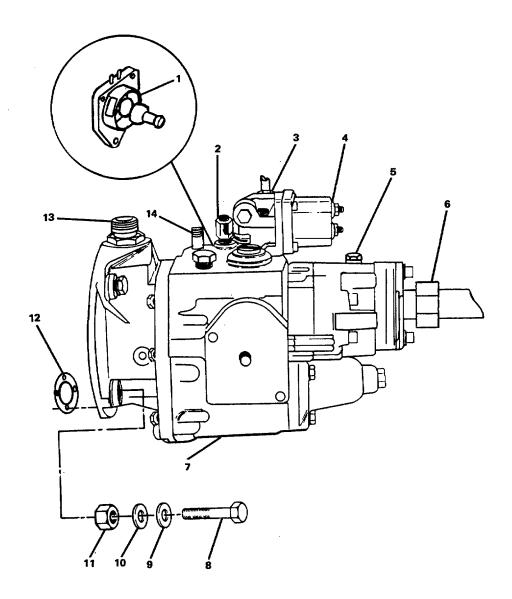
Pump, Fuel, Metering and Distributing Assembly.
